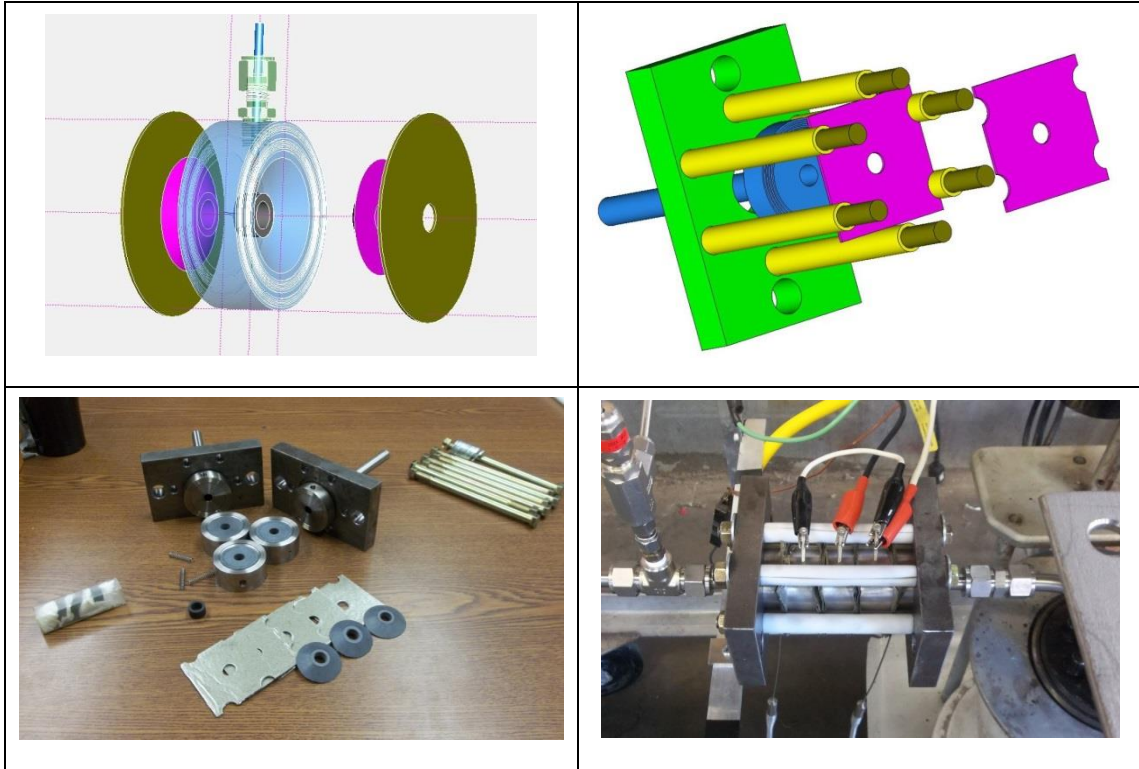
Clockwise from top left. (1) Flange, insulator and Mica gasket. (2) Compression assembly. (3) As-built and installed into CHTL Framework. (4) As delivered before assembly. Images provided by Michael Mohr (1, 3 & 4) and Dave Hultman Design (2).
